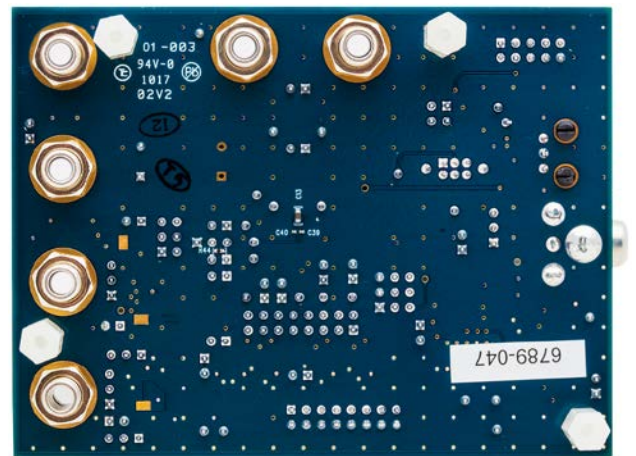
[SSM3525](#) Evaluation Board Bottom View
